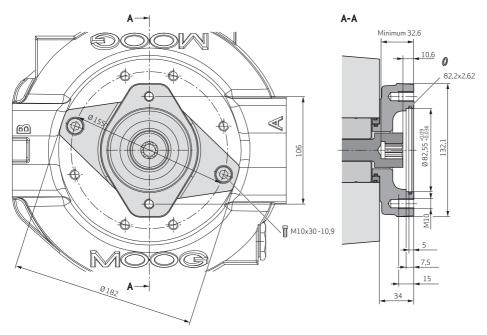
Adapter flange SAE-A with 9-tooth shaft
